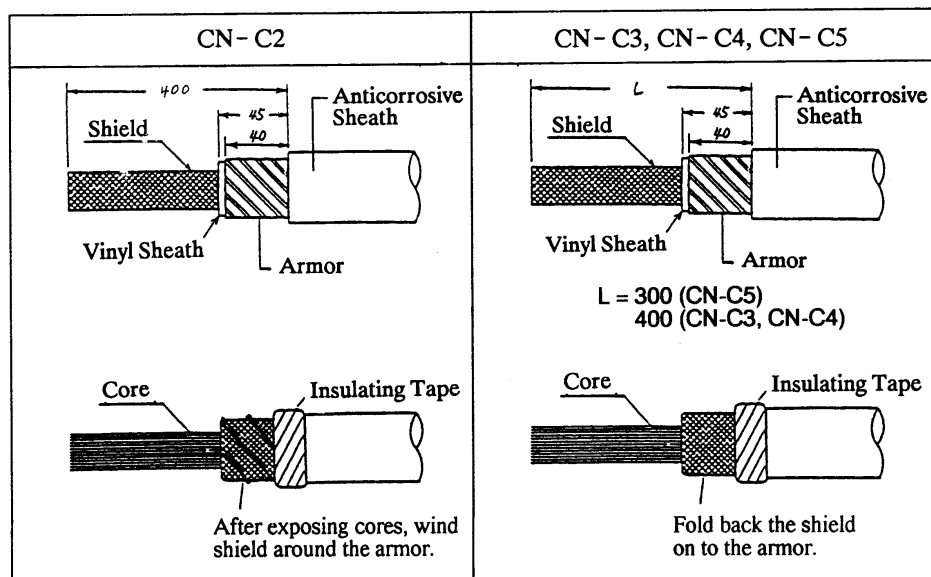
Fabricating cable 54-038-000-601/SC, 00-8016-020-000-703V
